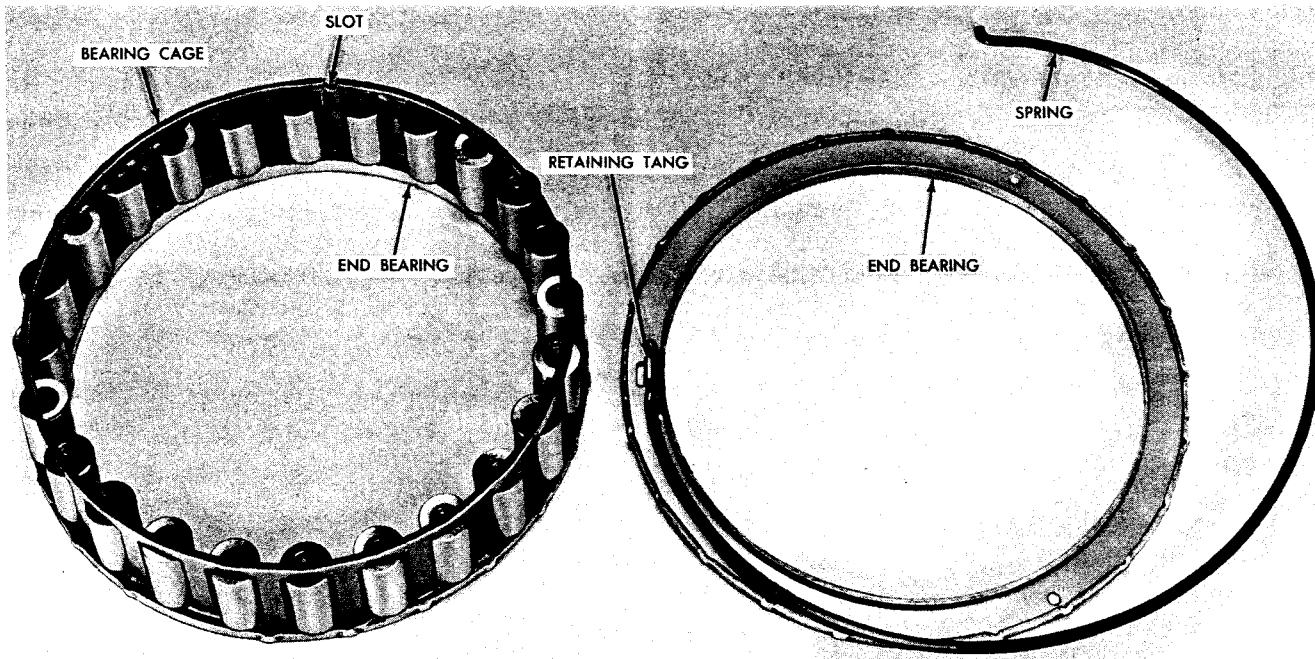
Freewheel clutch bearing cage and end bearing
